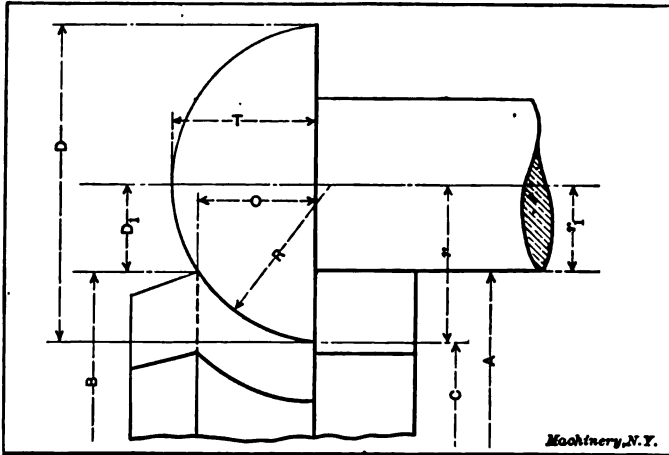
Diagram for Calculating Dimensions of Circular Tools forming Spherical Screw Heads
